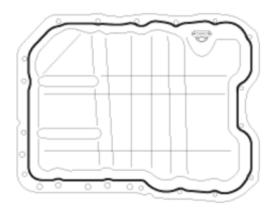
Identifying Sealant Application Area Courtesy of KIA MOTORS AMERICA, INC.
